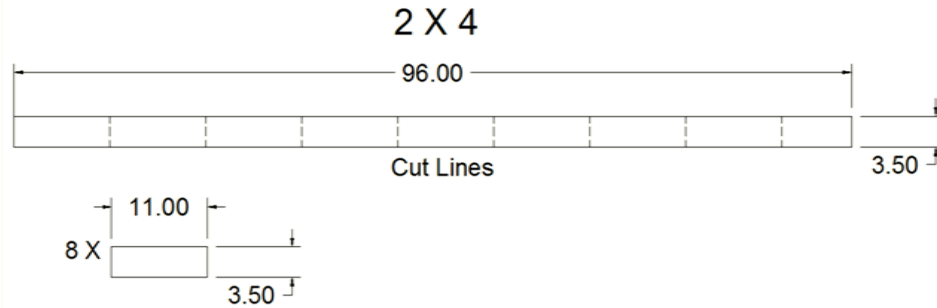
Cutting of Platform leg pieces (Dimensions are in Inches)
